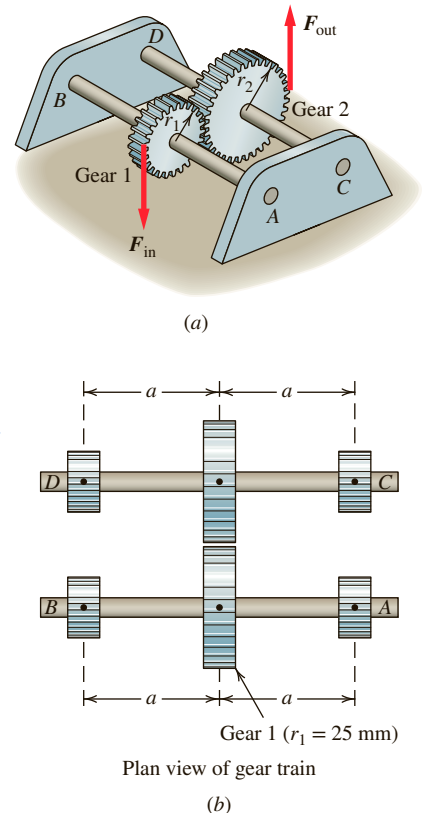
(a) A single-stage gear train (b) plan view of gear train.
